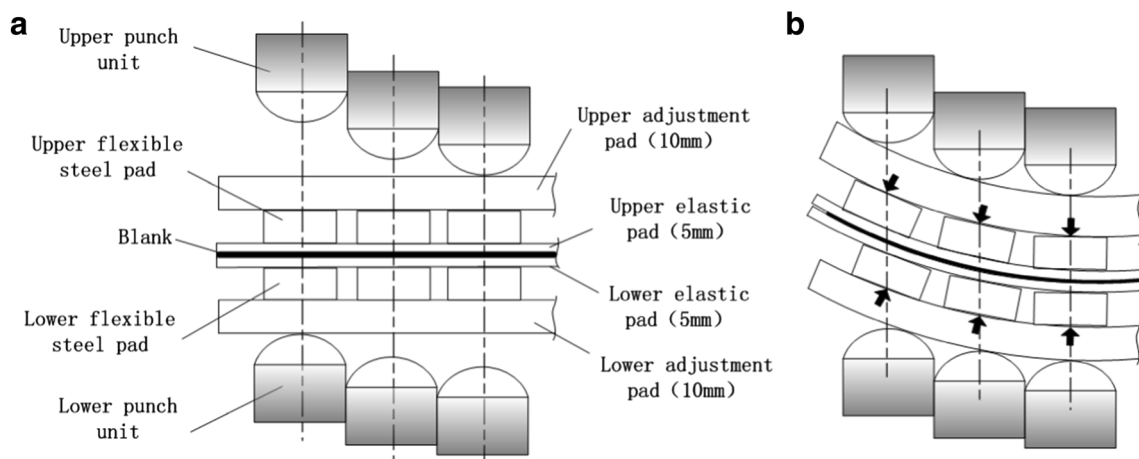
Flexible steel pad. a Start forming. b End forming
